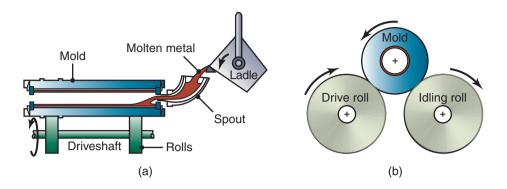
(a) Schematic illustration of the centrifugal-casting process. Pipes, cylinder liners, and similarly shaped parts can be cast with this process. (b) Side view of the machine.
